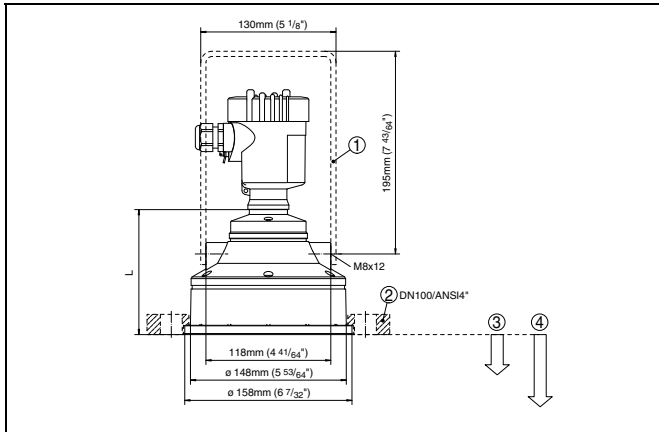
VEGASON 63, dimension L with Alu housing = 118 mm ($4 \frac{41}{64}$ "), dimension L with plastic and stainless steel housing = 113 mm ($4 \frac{29}{64}$ "
